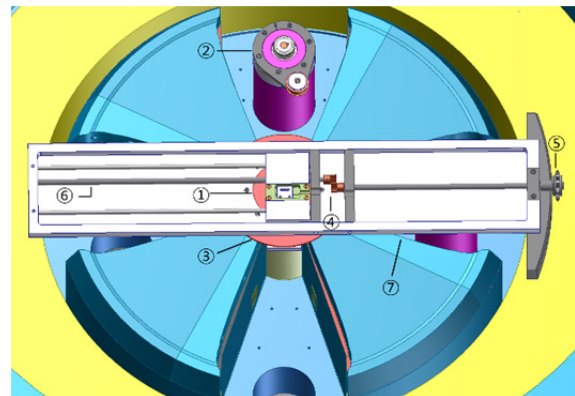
3D Model of Magnetic Field Measurement Instrumentation. ① : Step motor, ② : Hall Probe Sensor bracket, ③ : Rotation Plate, ④ : Spur Gear, ⑤ : Ratchet Gear, ⑥ : Linear Guide, ⑦ : Rotation jig.
